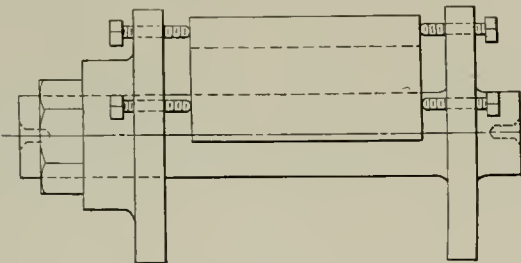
Arbor for Turning Driving Box Brasses on a Lathe
